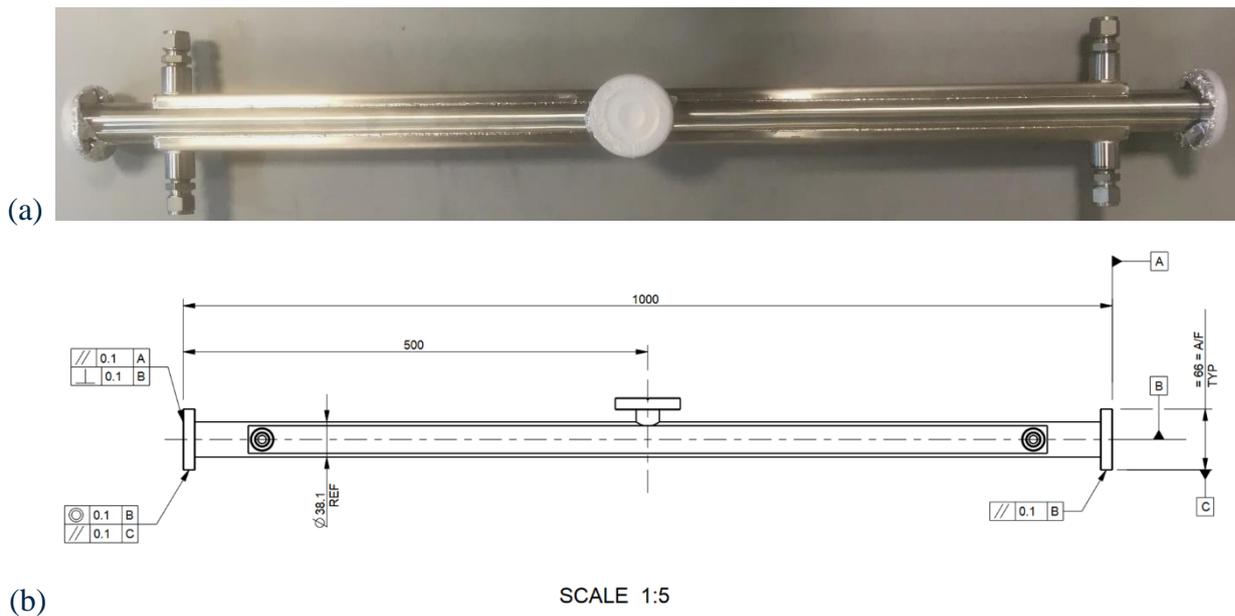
(a) Photograph of the first sample for NEG coating and testing under SR at DLS beamline, (b) A dimensioned drawing of the same test piece.
